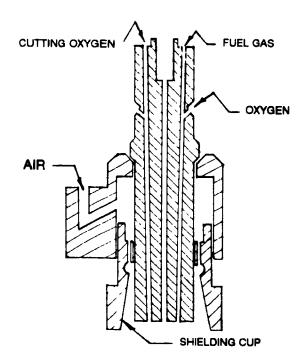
TYPICAL UNDERWATER GAS CUTTING TORCH TIP<sup>5</sup>
